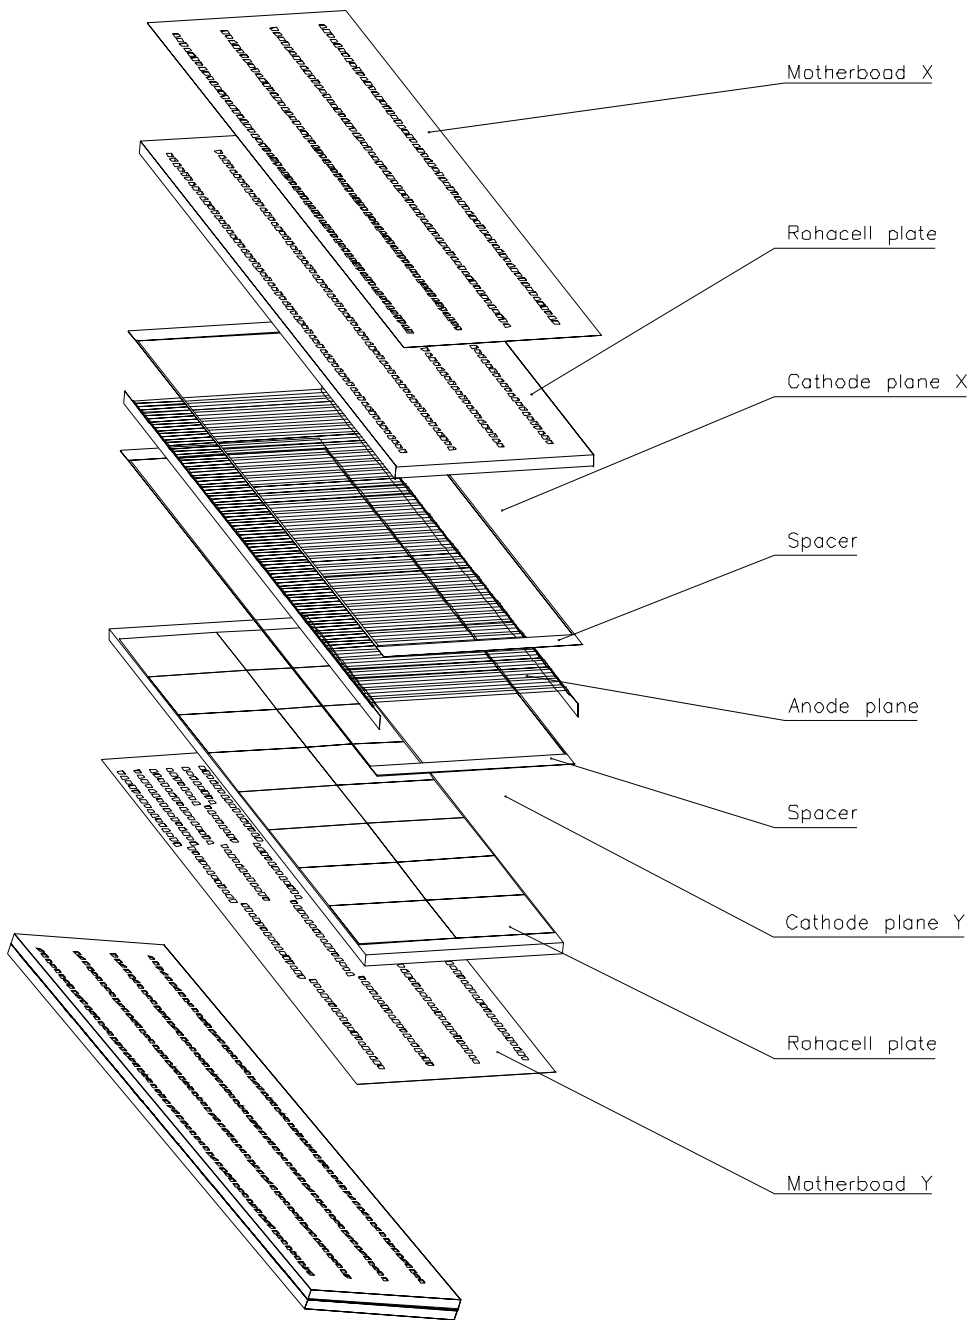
Exploded view of the module. Assembled module is shown at bottom.
